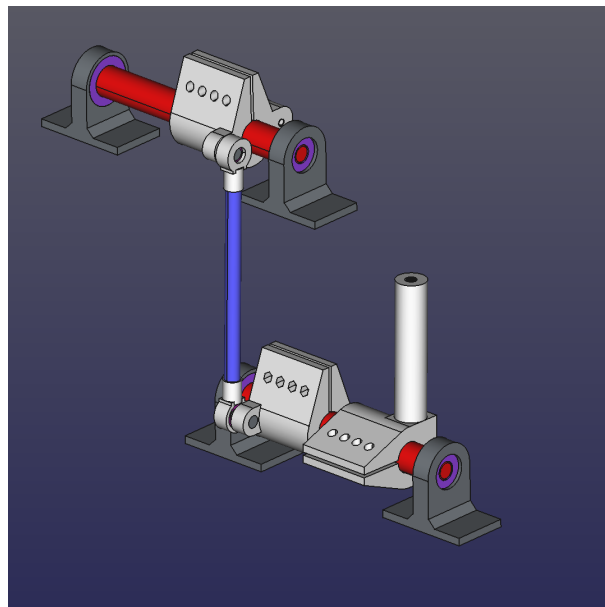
CAD assembly of iteration 2. Rod lengths are shortened in the model for clarity; the physical prototype used full-length rods.
